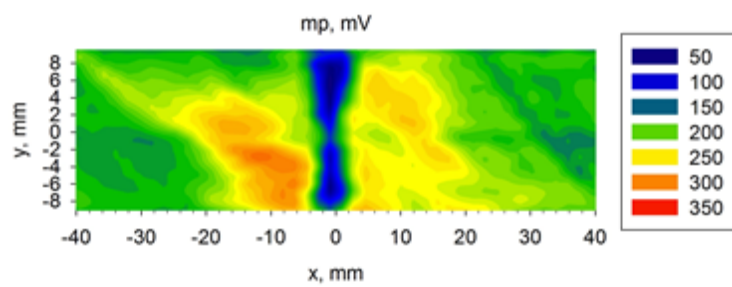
Map of mp in direction perpendicular to the laser weld.
